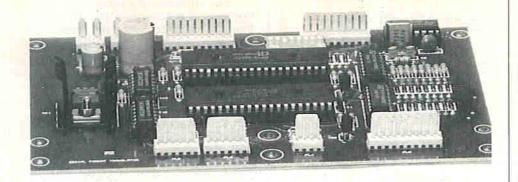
The Completed PCB. Note that all the Connector Tabs face one way.
